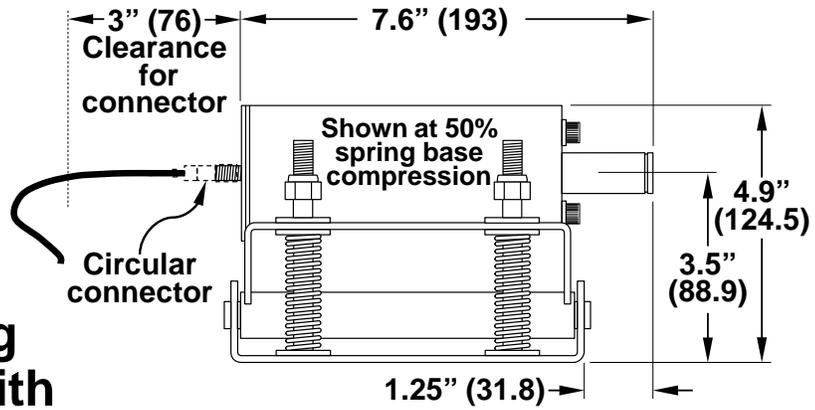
Spring Base with 5100-11 Encoder Dimensions
